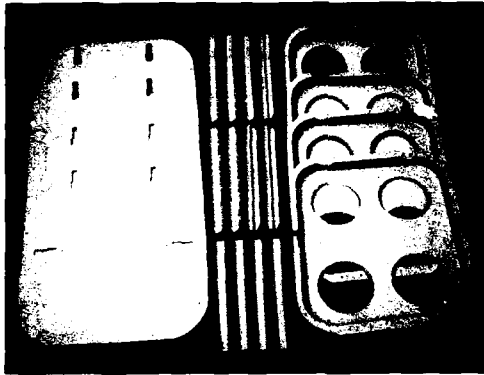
Parts out of 2091 before assembling access doors, type A 31285-404
